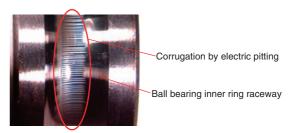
Example of electric pitting on inner ring raceway of ball bearing
